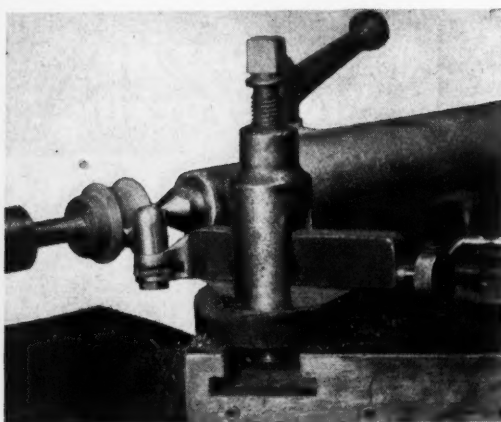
Adjustable Radius-Turning Tool in position for turning a small spool-pulley.
